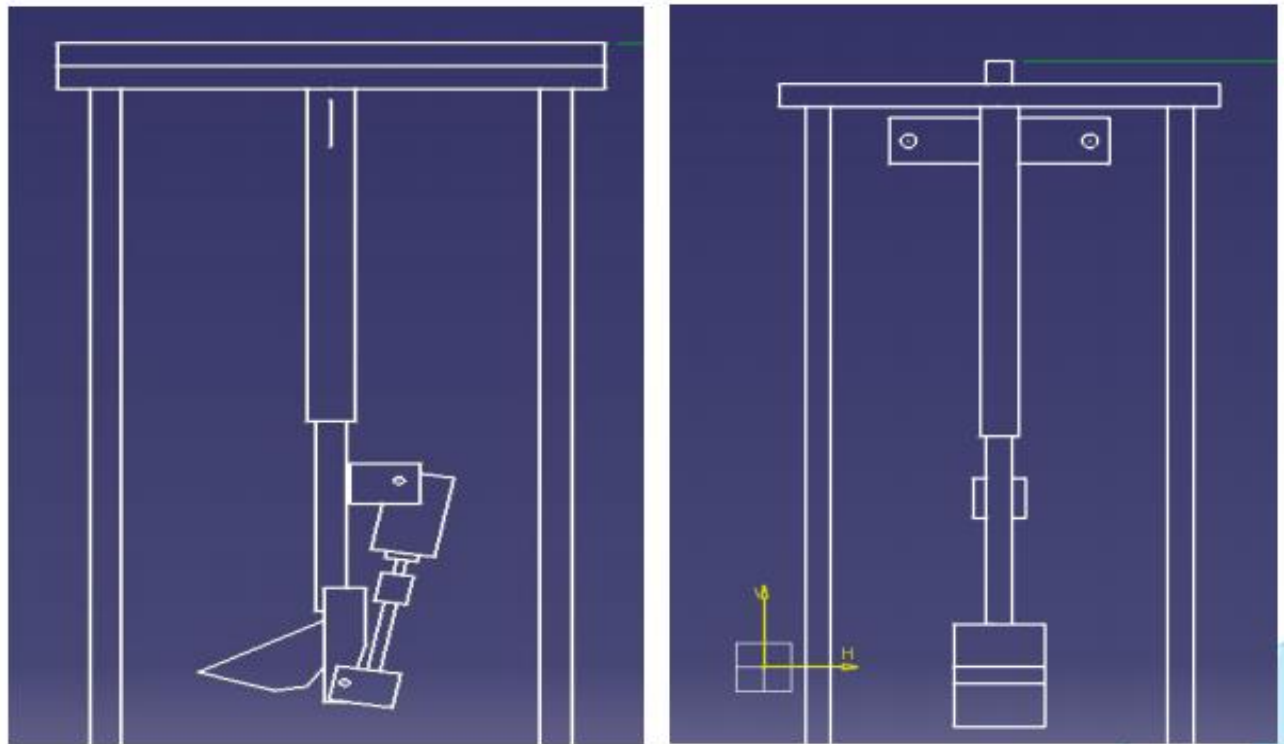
AutoCAD Design of the Manhole Clog Removal Machine
